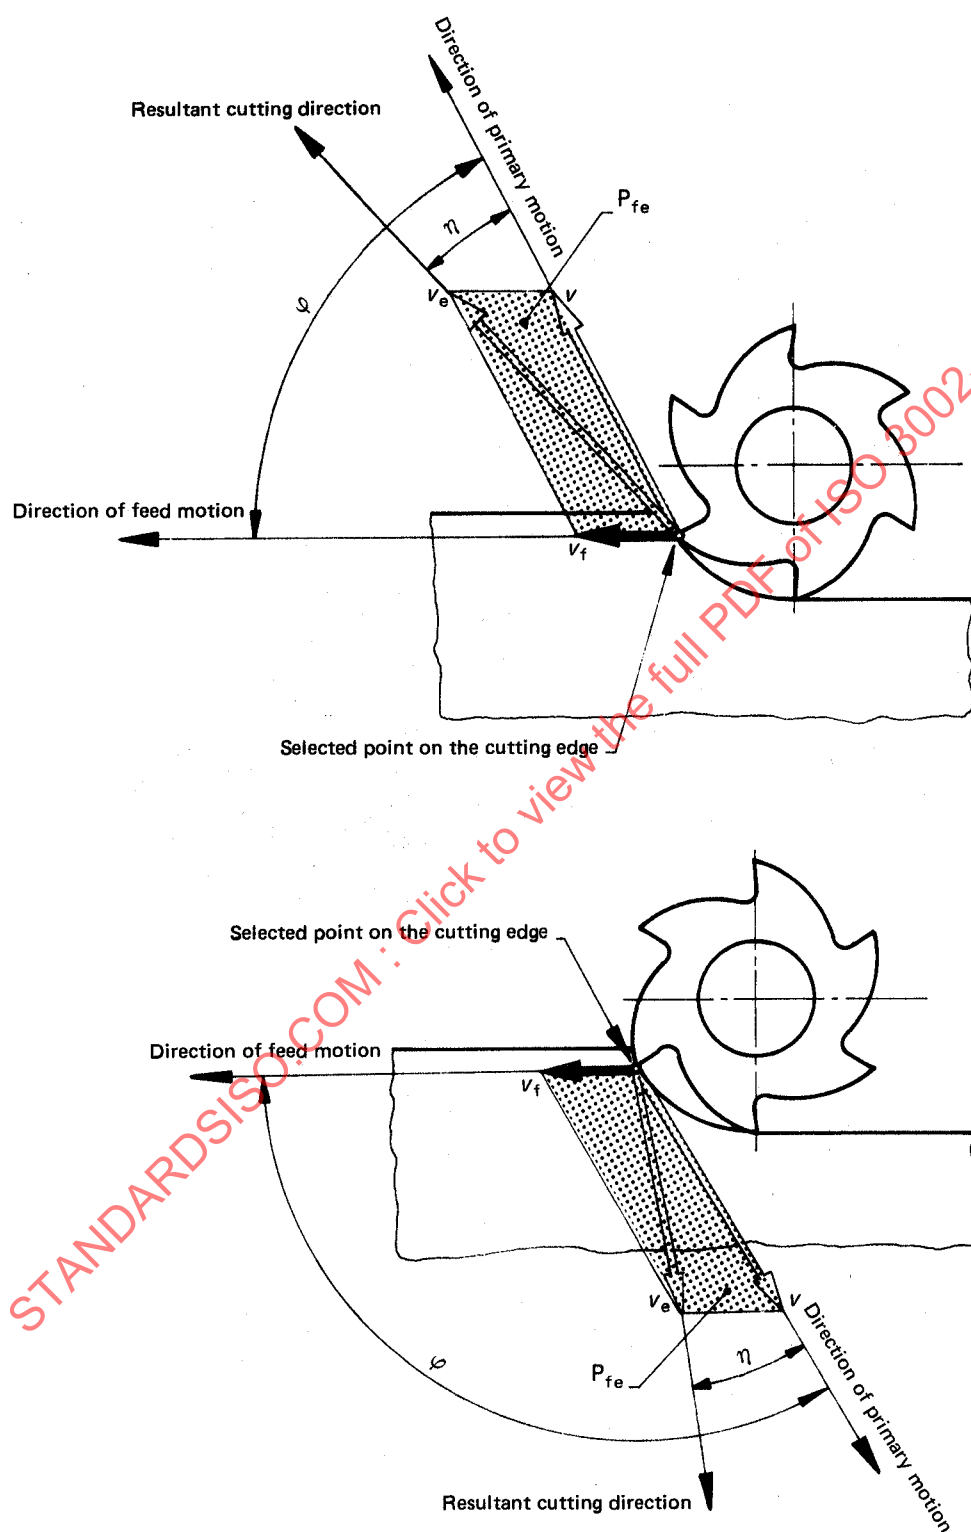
Tool and workpiece motions – Slab milling cutter
